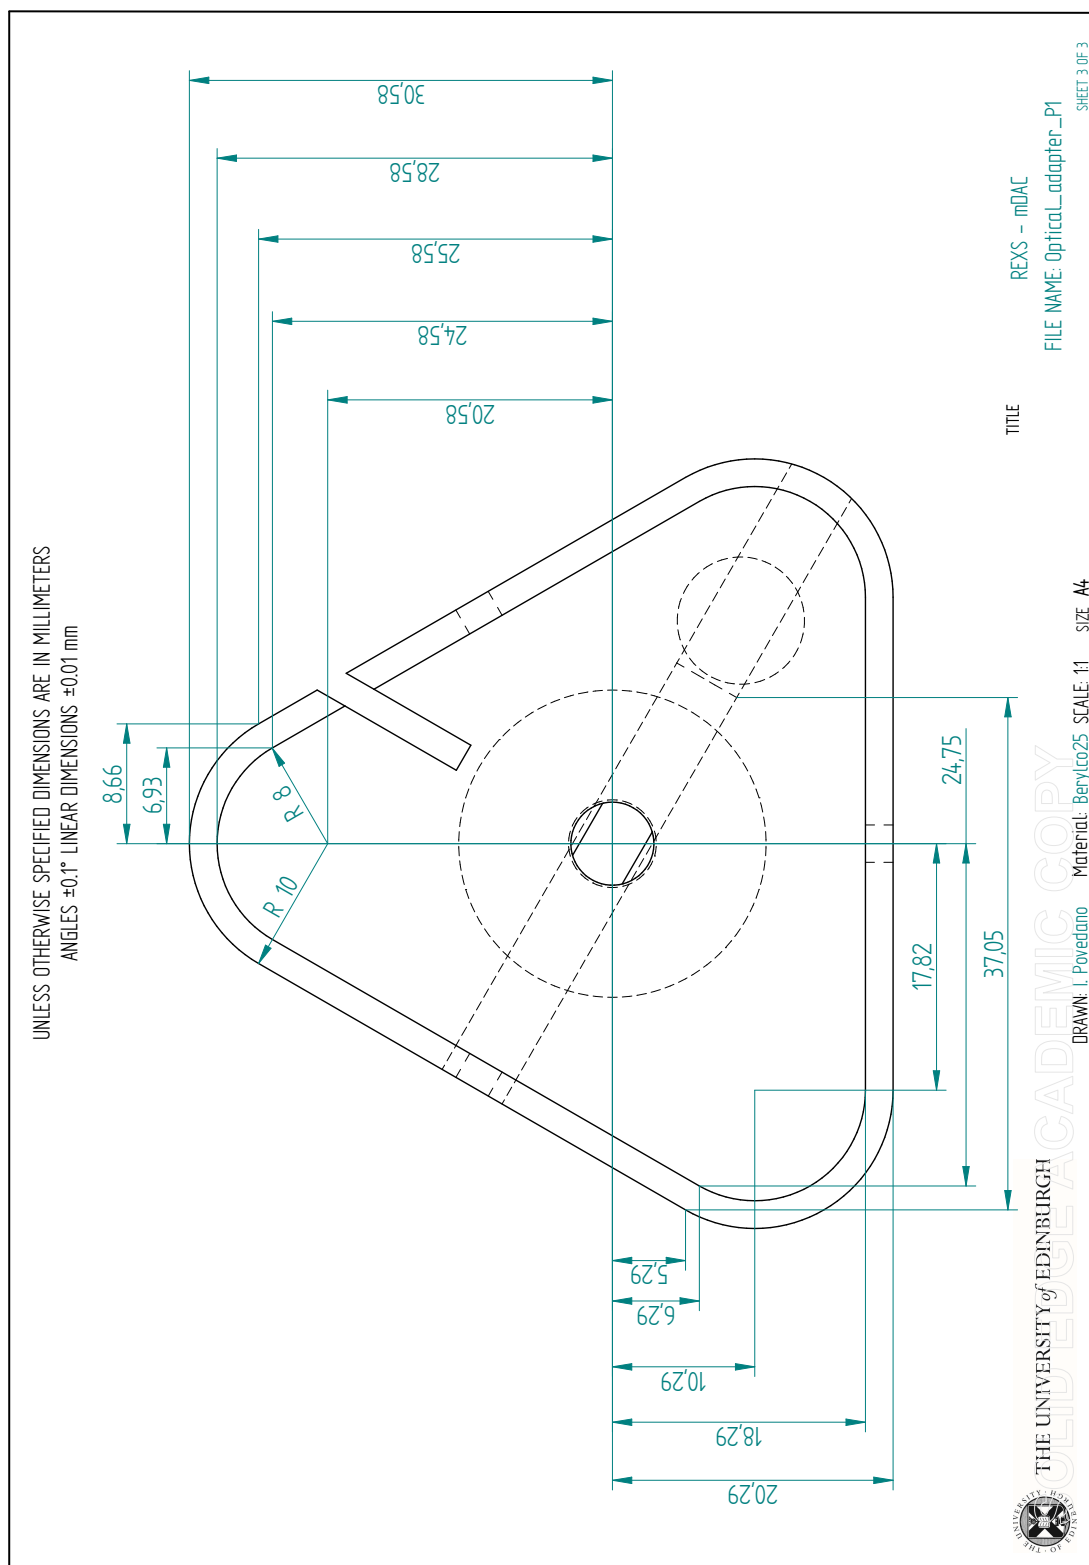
Optical holder prototype 1. Sheet 3 of 3.
